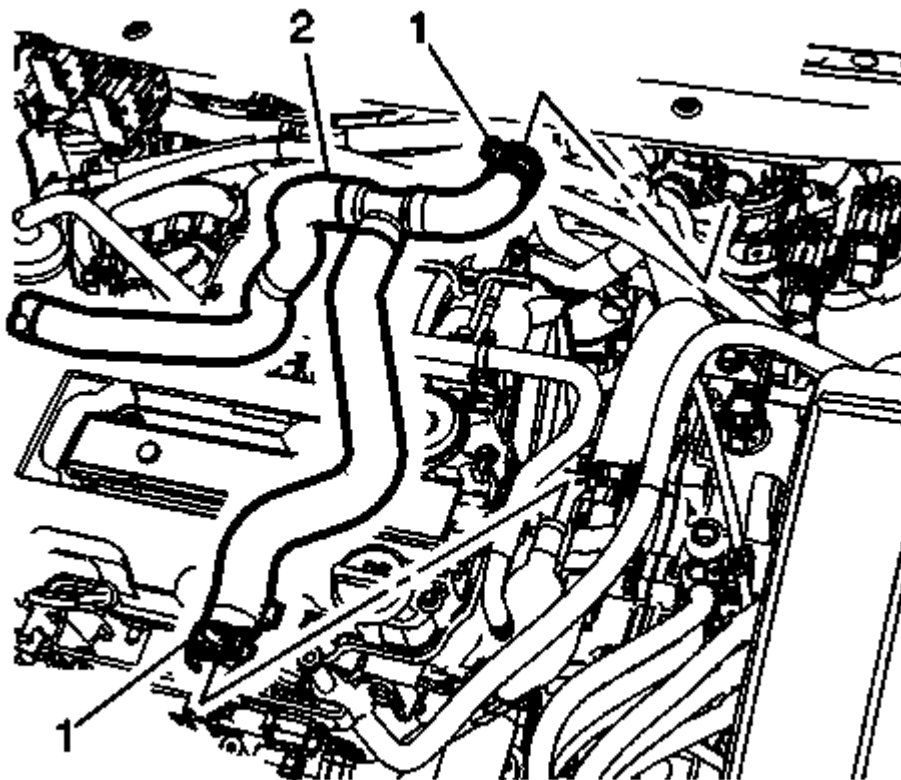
Heater Water Auxiliary Pump Inlet Hose
